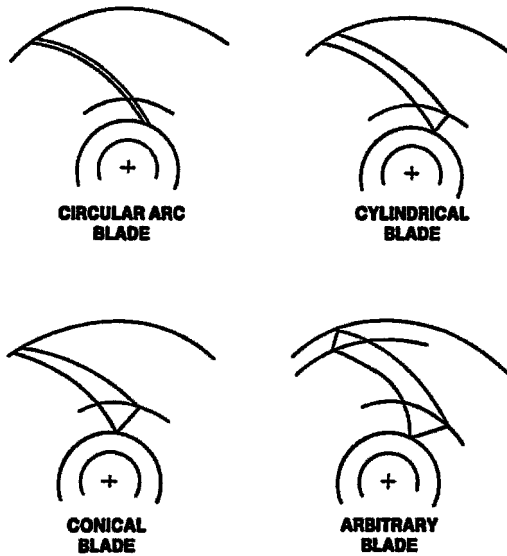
Impeller blade shape choices. (*Dresser-Rand Company, Olean, N.Y.*)
